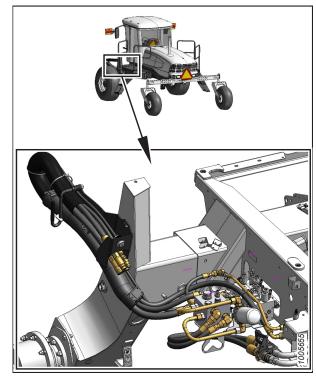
Auger Drive Basic Kit and Completion Kit Installed
